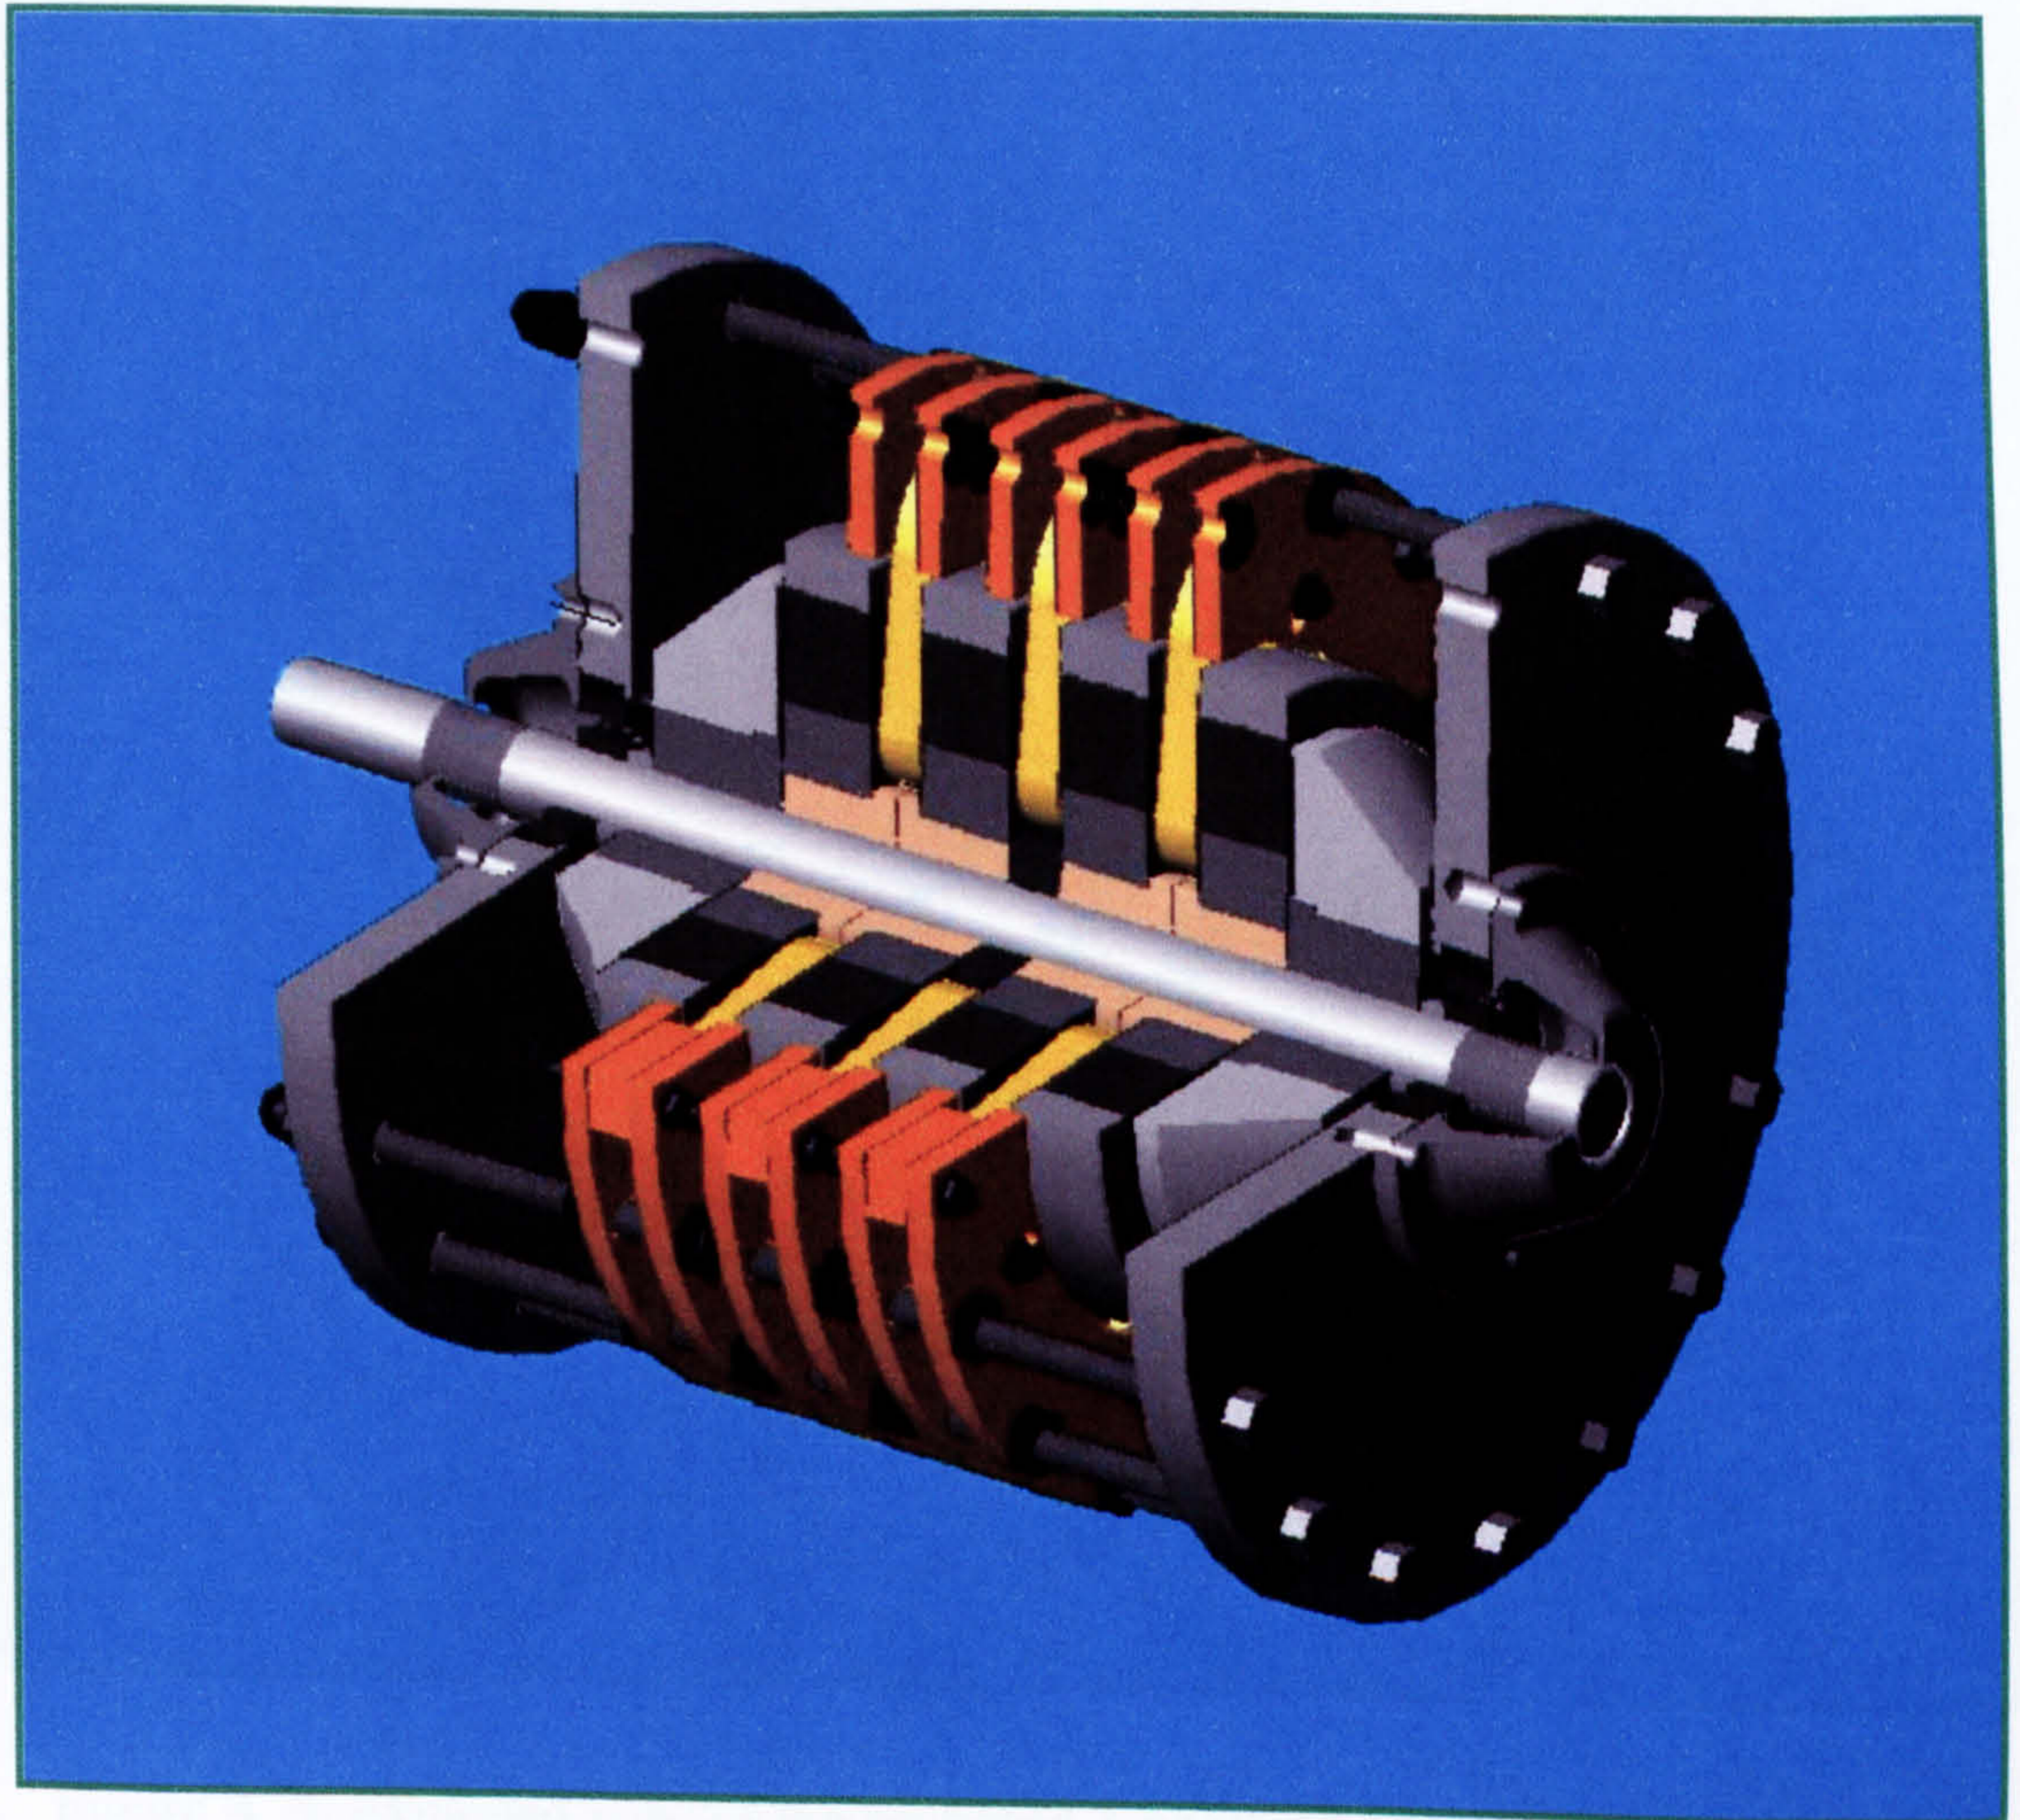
Exploded view for a three-phase *PMAF* high-speed generator
